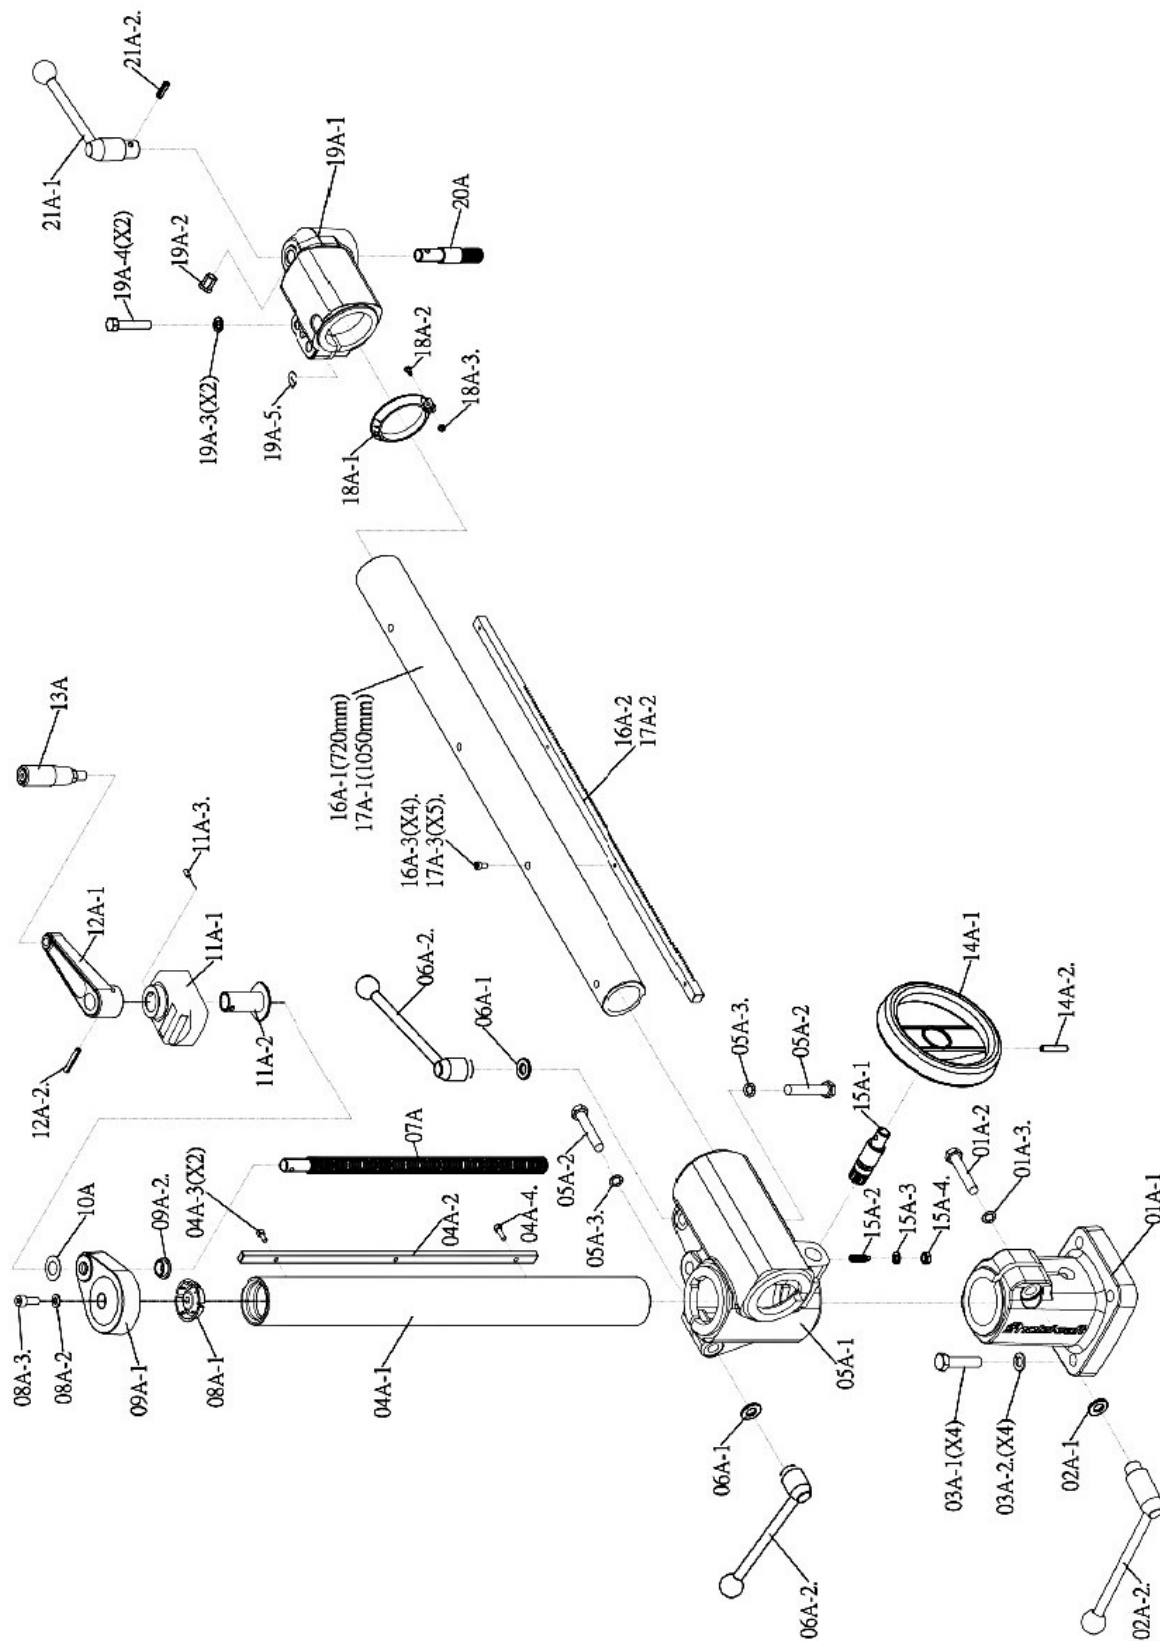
Spare parts drawing 2 - tripod of feed unit VSA 400 DC
